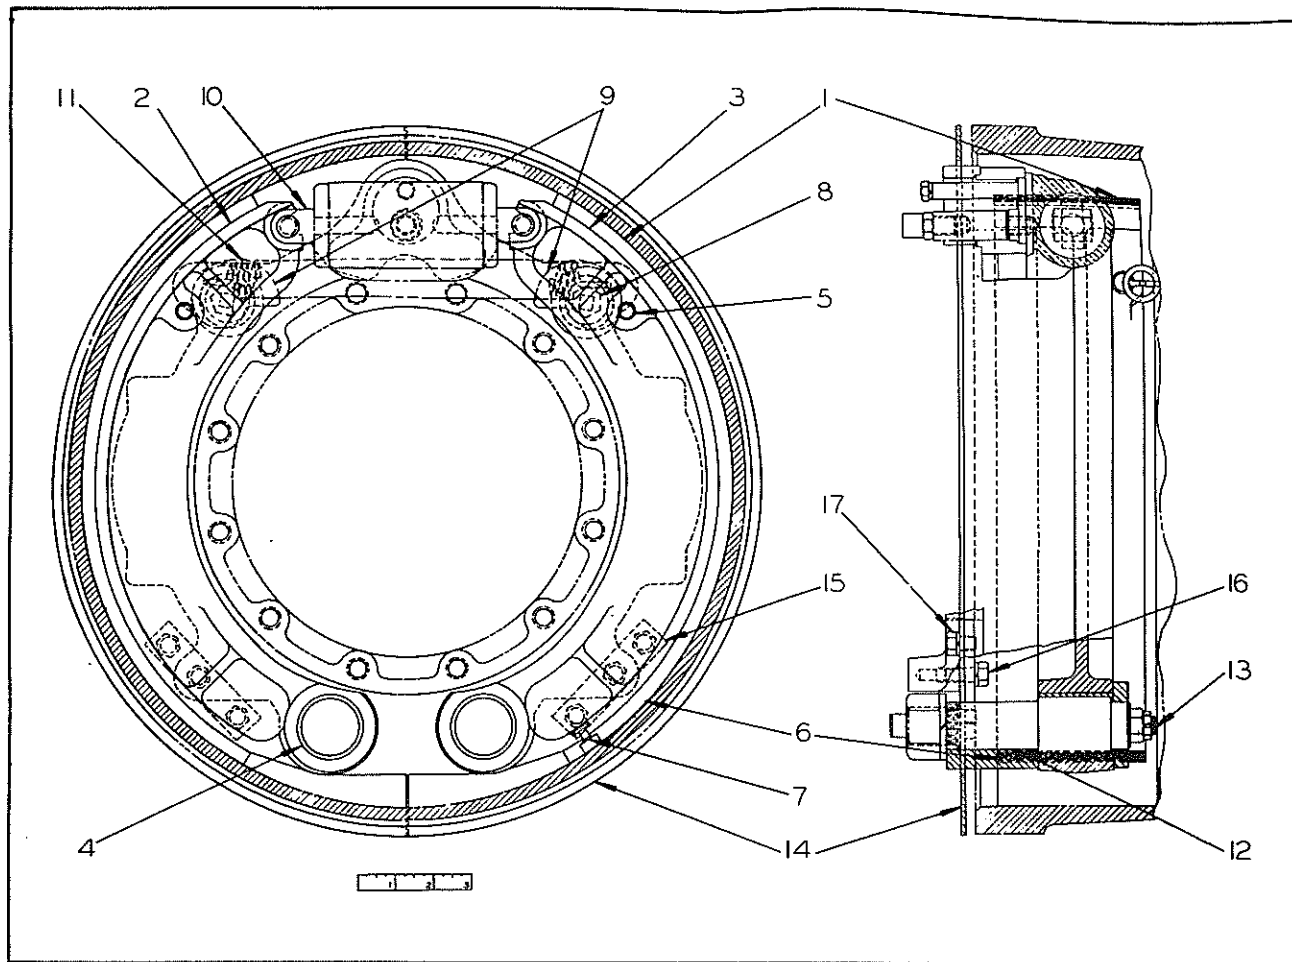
BRAKE ASSEMBLY (REAR AXLE) LEFT AND RIGHT
